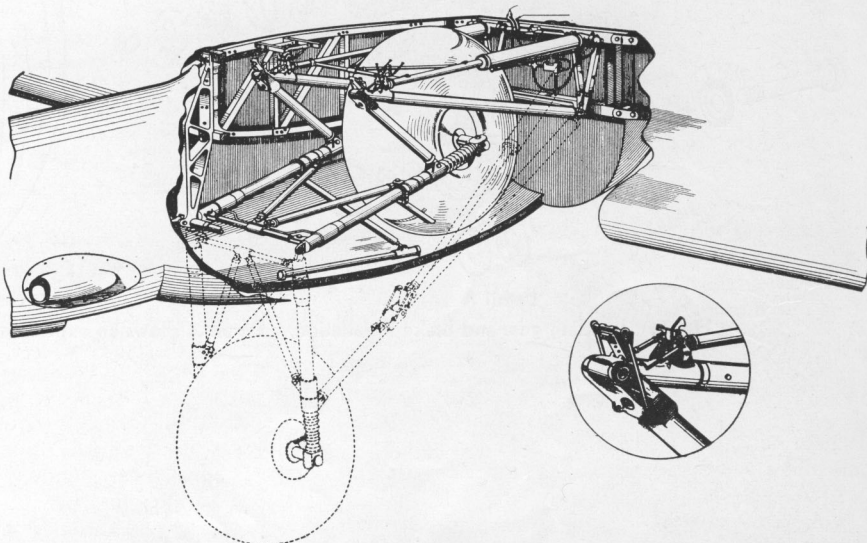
Phantom view showing the method of retracting the Lancaster main landing gear, in which the wheel is hydraulically pulled aft and up into a well between spars behind the inboard engine nacelle. The detailed sketch in the circle at the lower right gives an enlarged view of the retracting strut locking mechanism.
